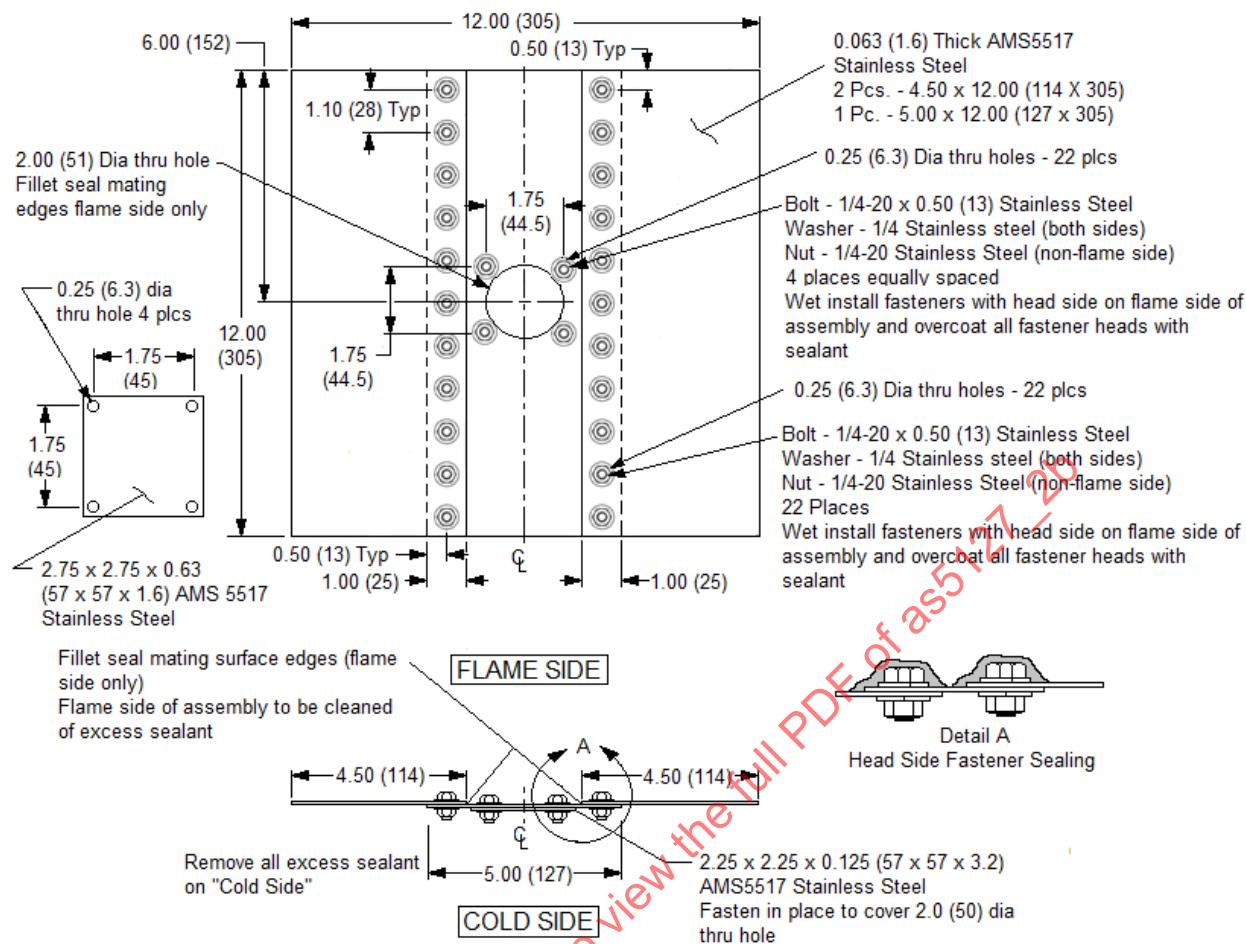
WIRE BUNDLE CONNECTOR SEALING ASSEMBLY
